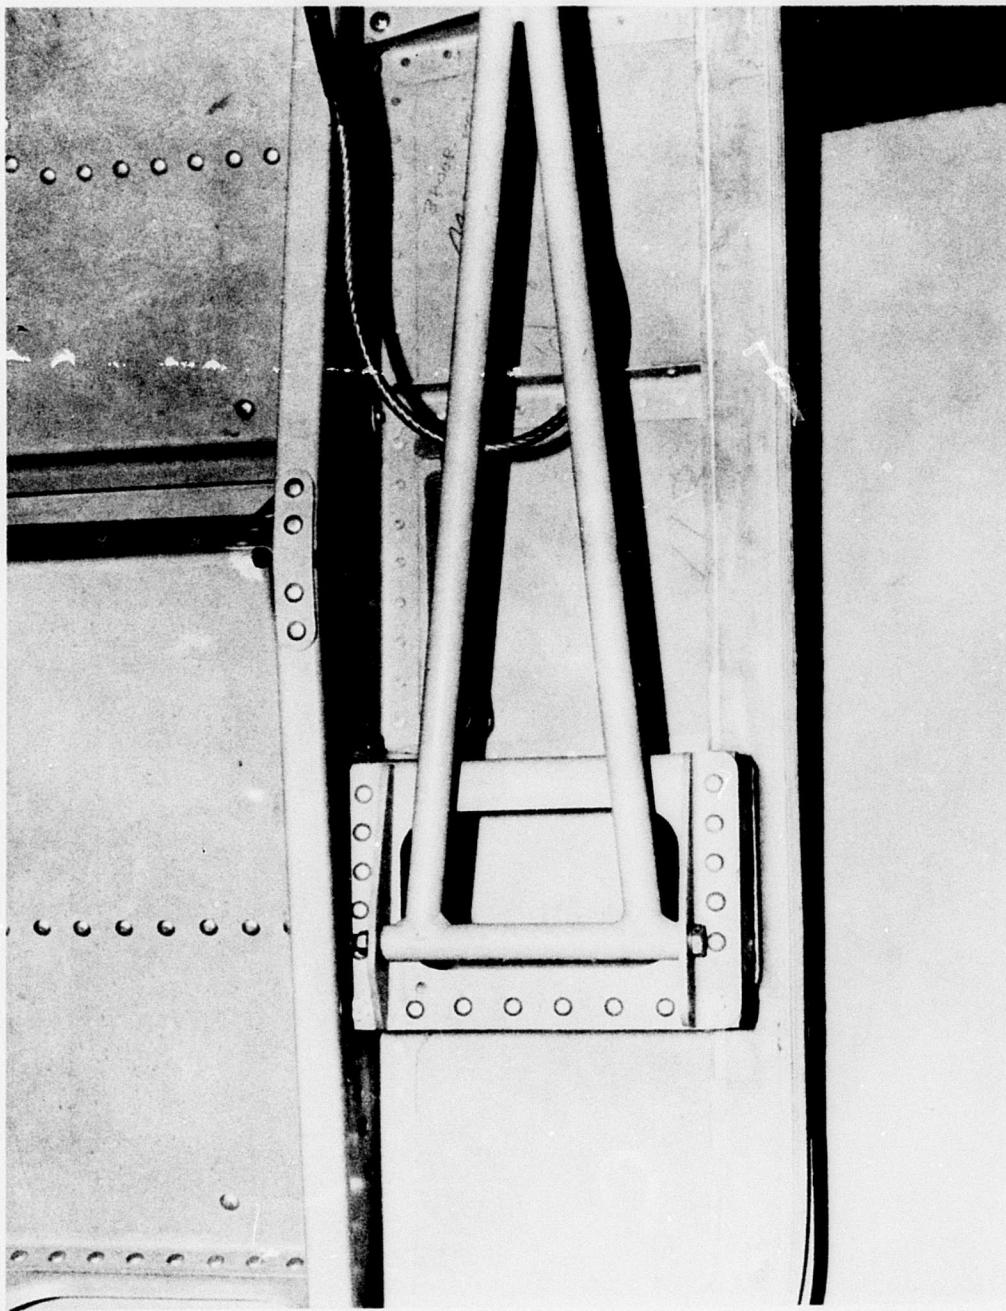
Lower Personnel Door, Redesign, Support Assembly.
